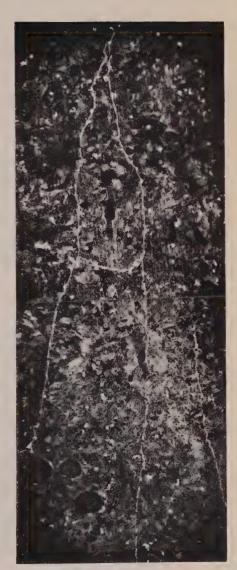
Same Steel, showing zone of fracture across plane perpendicular with axis of test piece.  $\times$  37 and reduced \$ size.
